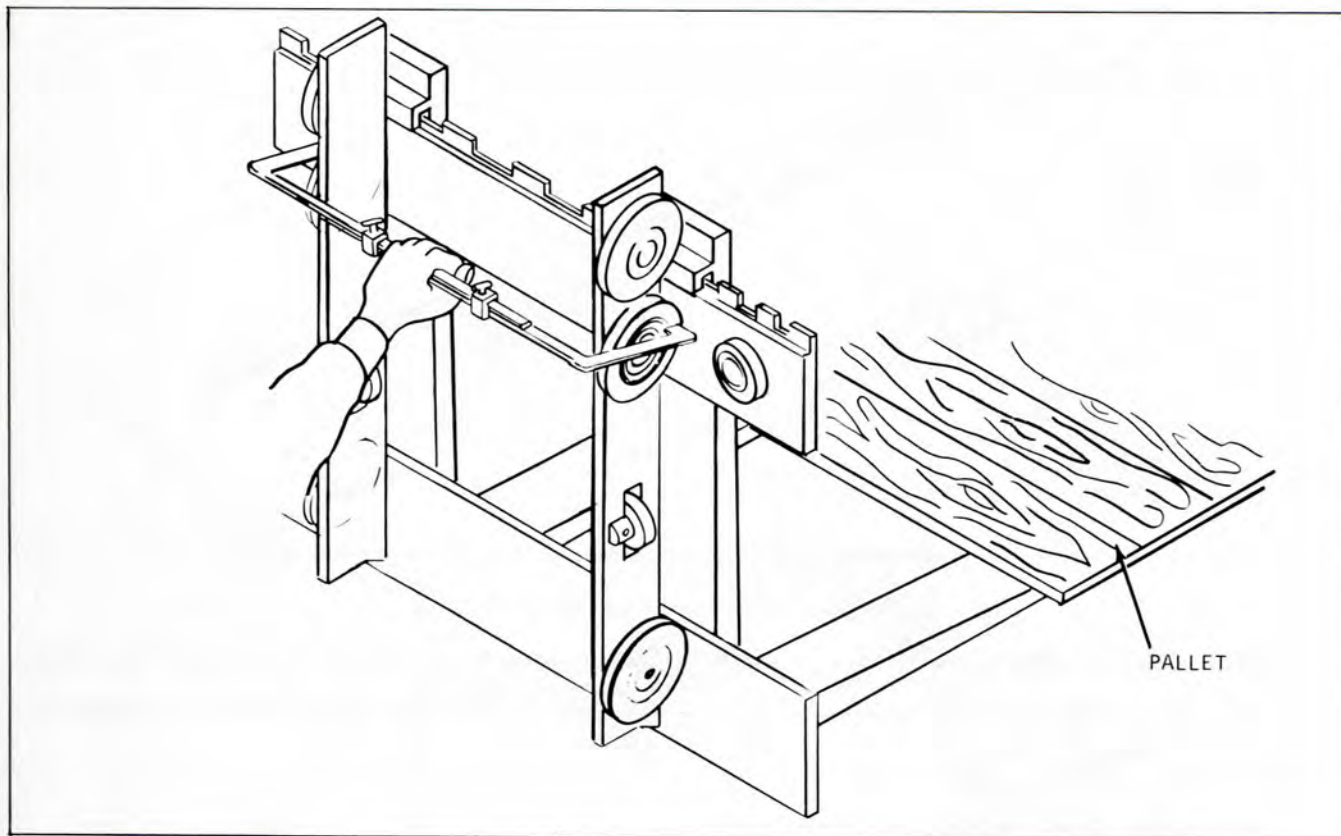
Spanning Upper Rollers (Six Roller Carriage)
